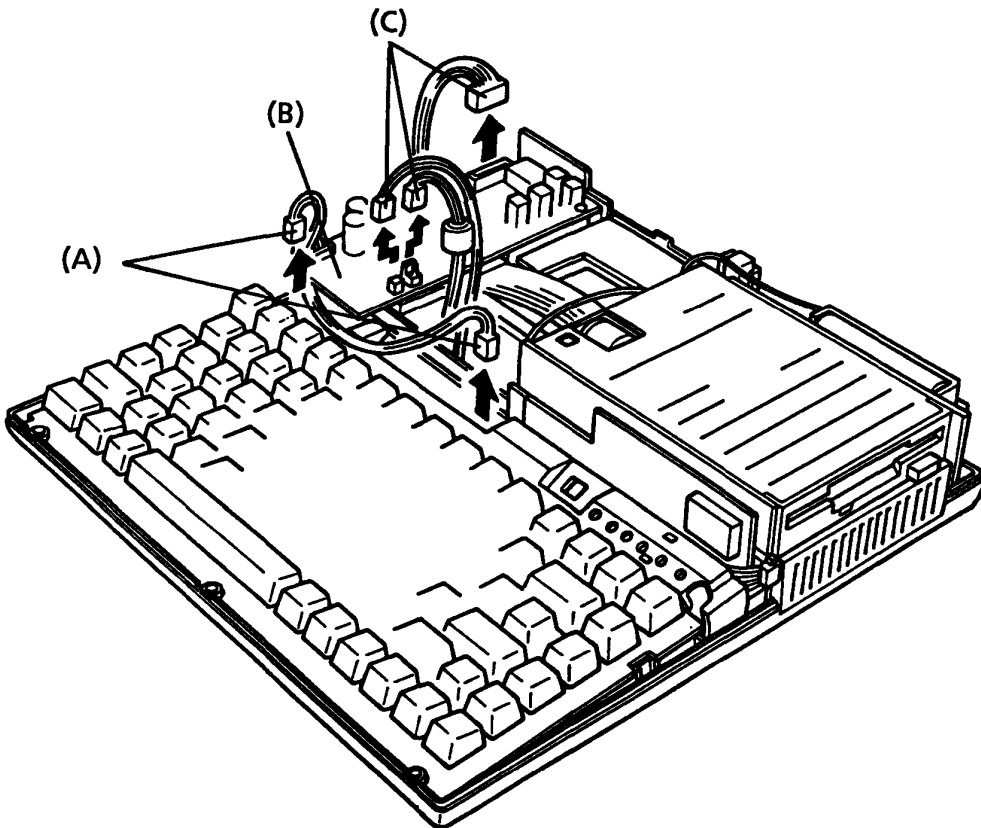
Disconnecting the Power Supply PCB Cables
